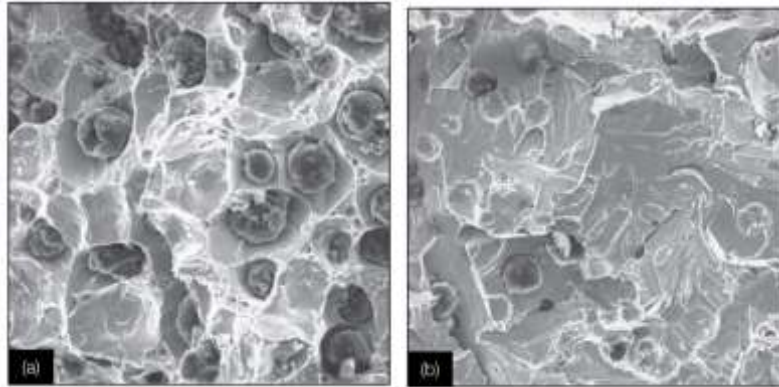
7: (a) Ductile fracture surface of 3.1%Si (b) Brittle fracture surface of 4.2%Si. Adopted from [16].
